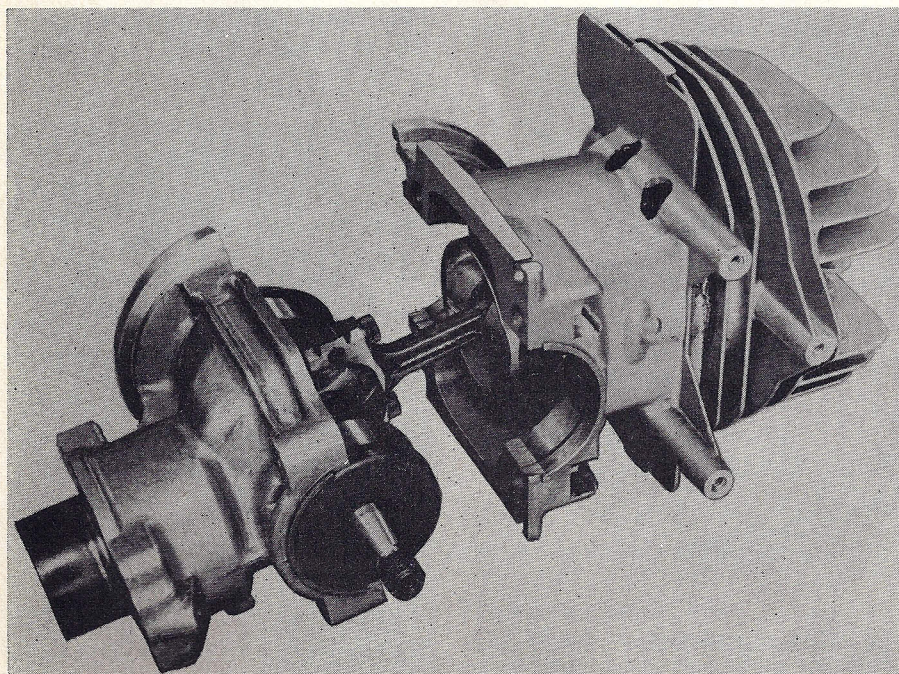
Crankcase is split to remove crankshaft, pistons, connecting rods and bearings as an assembly.
